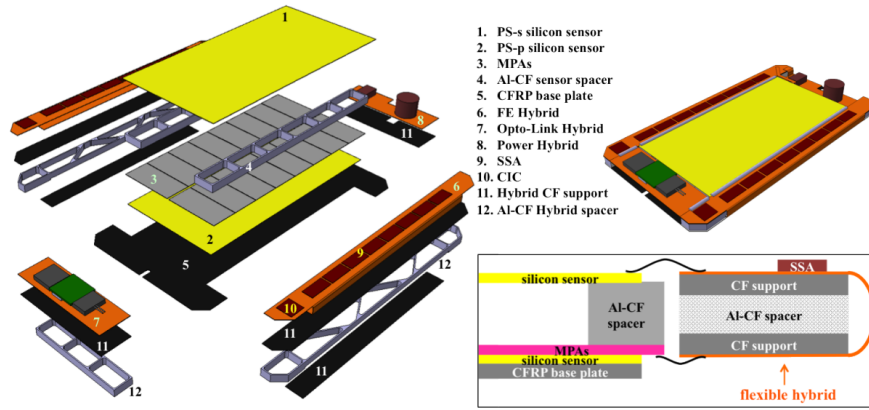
Exploded view of Pixel Sensor Module.
